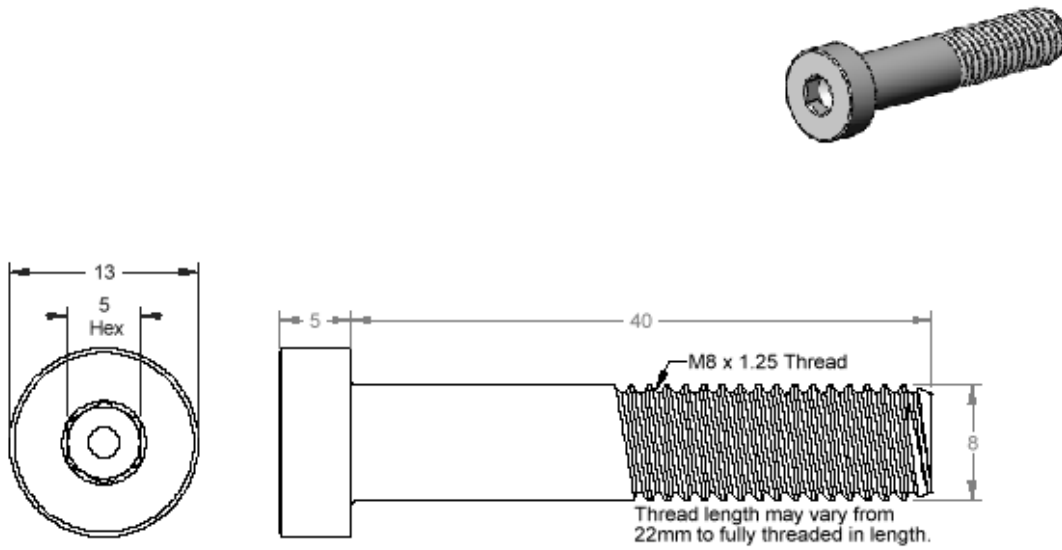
CAD model on 8mm Grade 8.8 showing its dimensions
